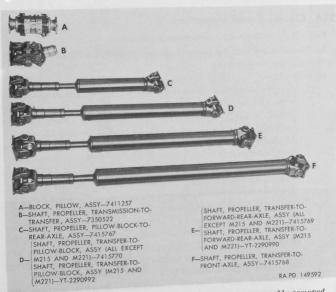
Propeller shaft assemblies and pillow block assembly removed.
